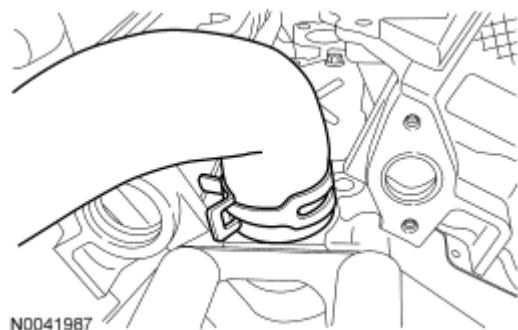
Locating Coolant Pump Hose From Cylinder Block Outlet
